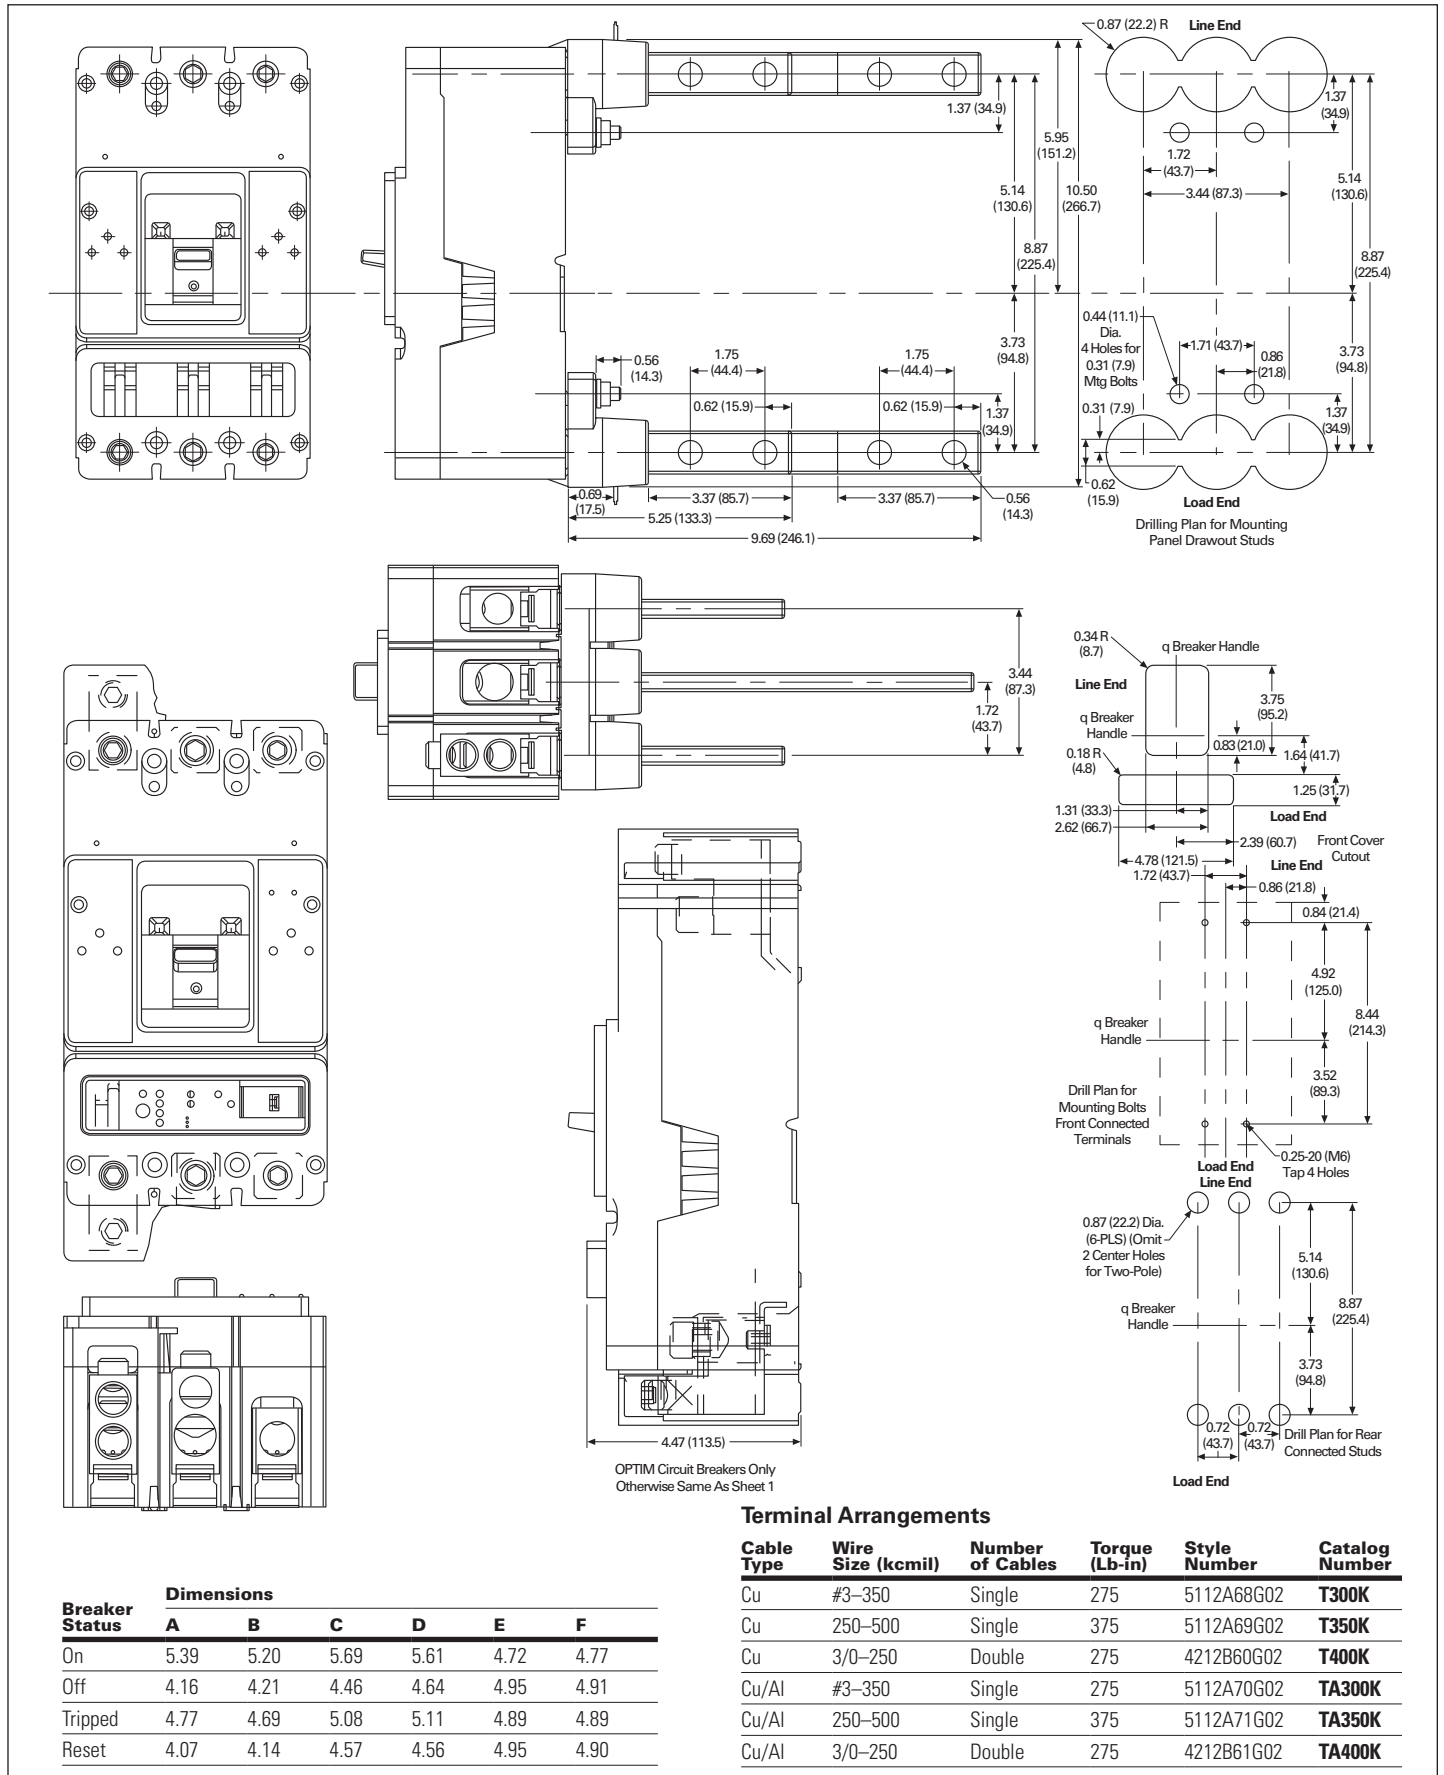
Type KG 300-400A Three Pole—Dimensions in Inches (mm)
